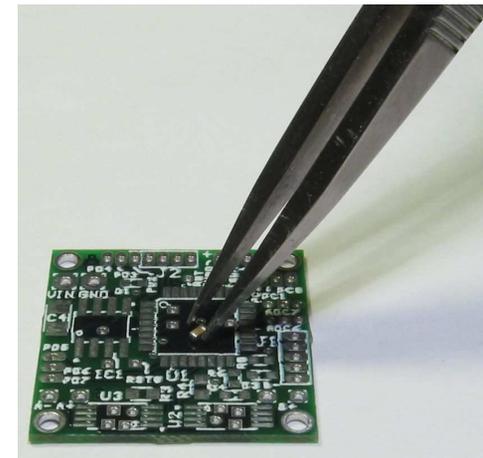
Fine tipped tweezers are necessary for soldering small parts.
